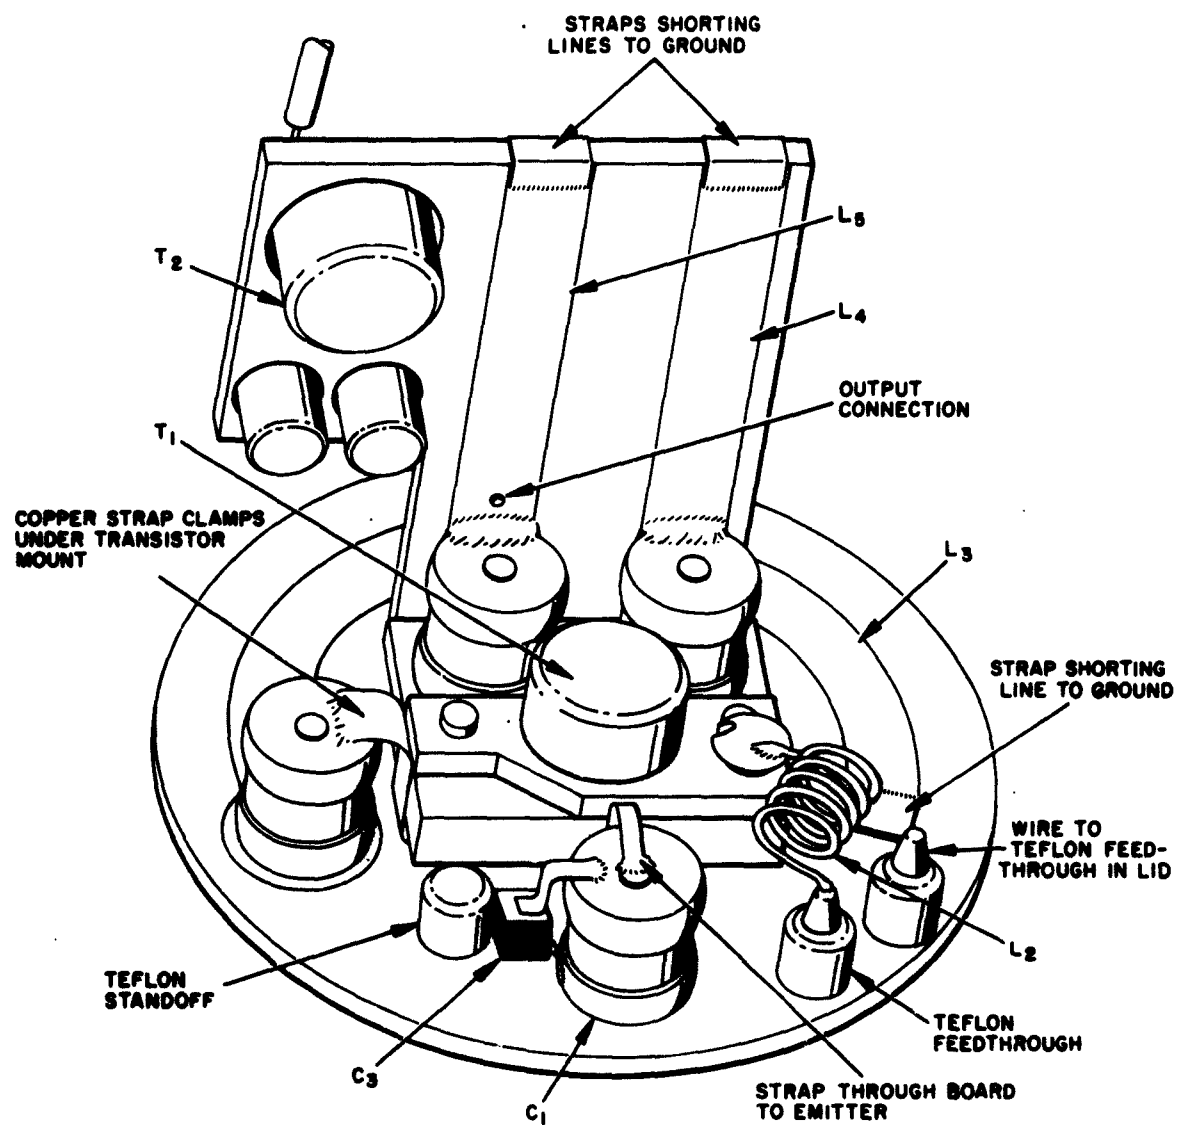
CIRCUIT ASSEMBLY (FRONT VIEW)
